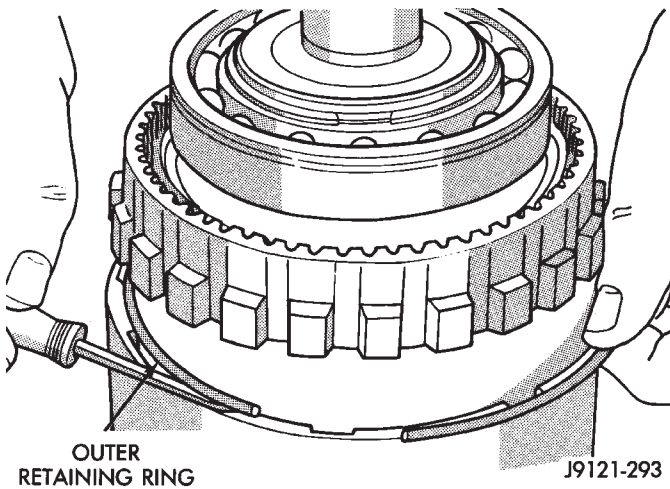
Removing Clutch Drum Outer Retaining Ring
